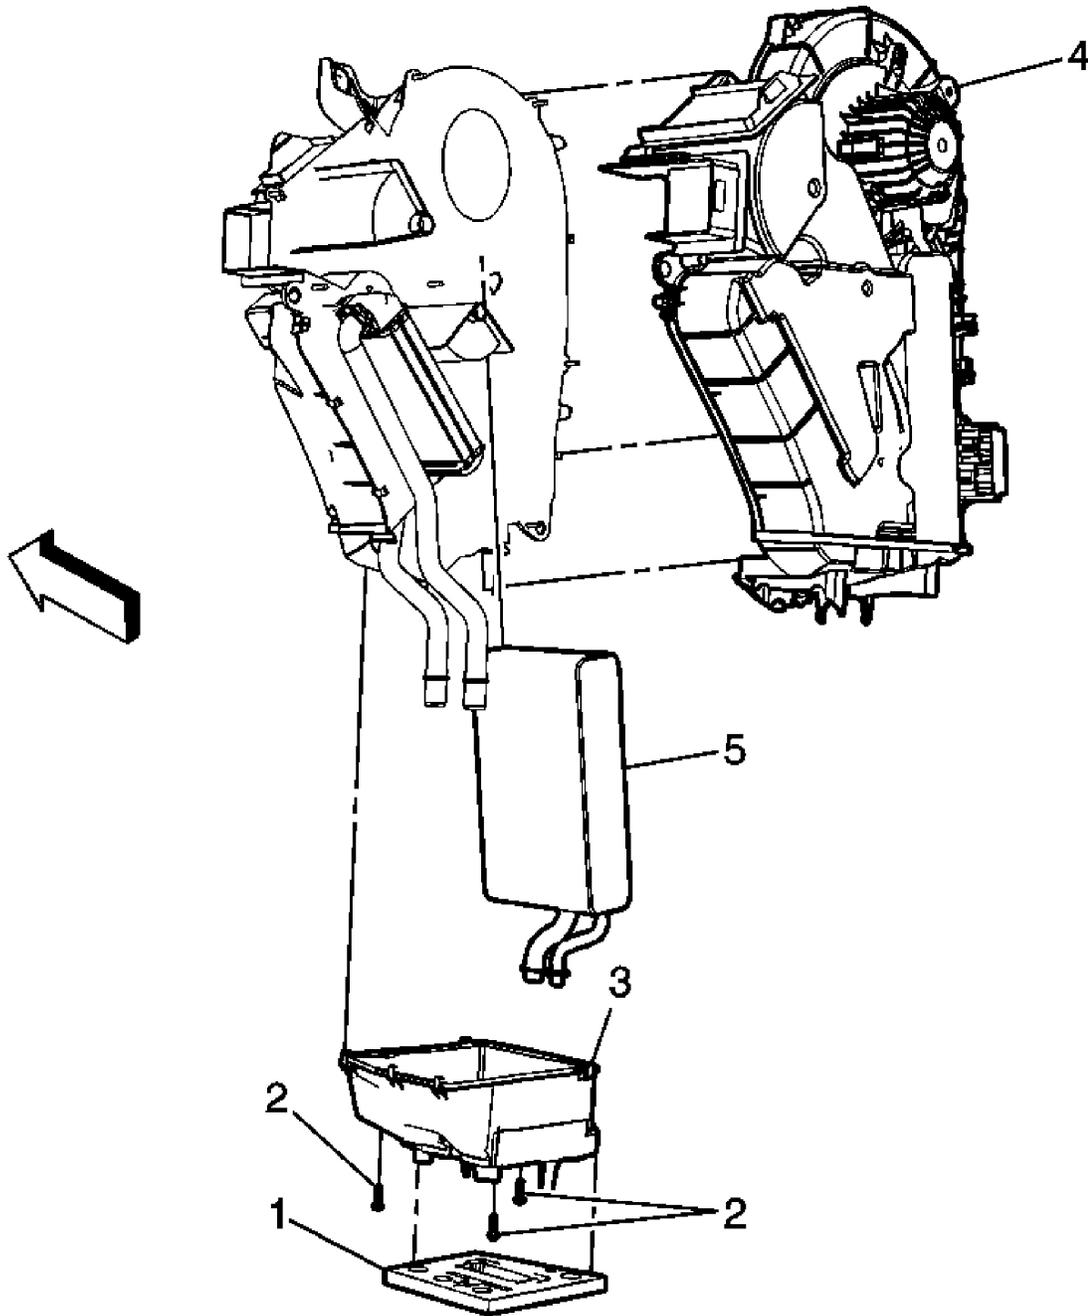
View Of Auxiliary Air Conditioning Evaporator
